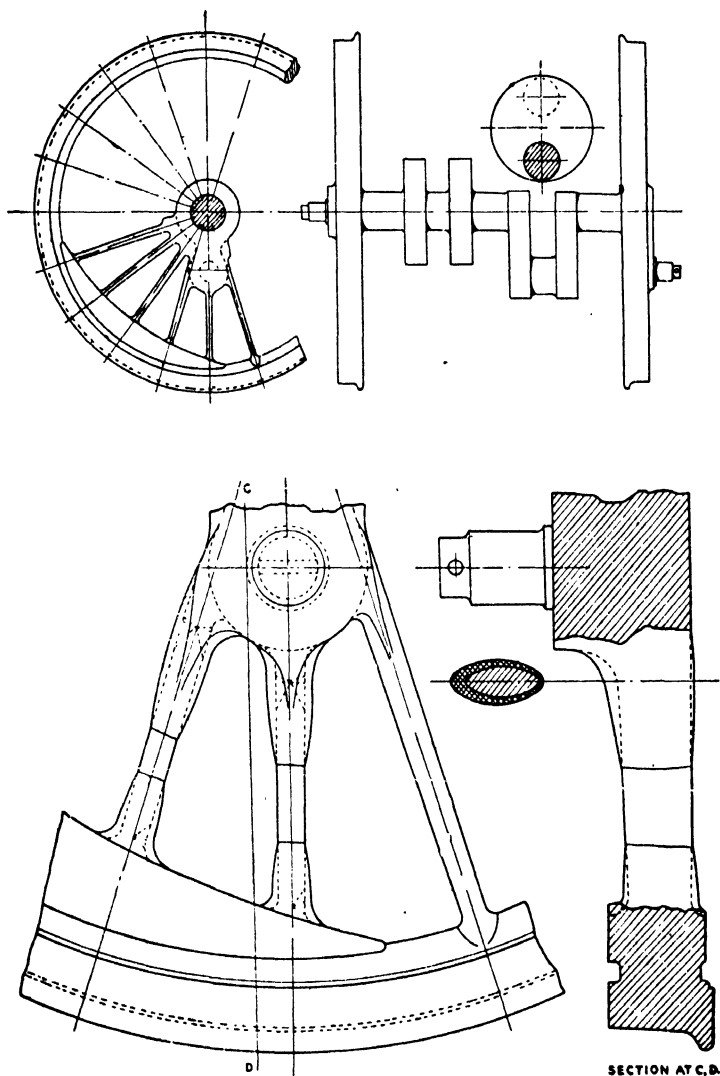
LOCOMOTIVE WHEEL SPOKES WELDED.
